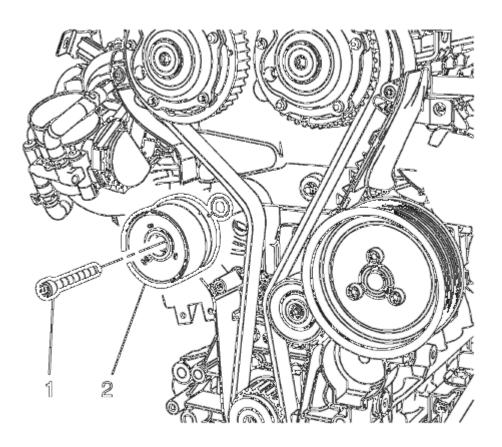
Timing Belt Tensioner And Bolt Courtesy of GENERAL MOTORS COMPANY
